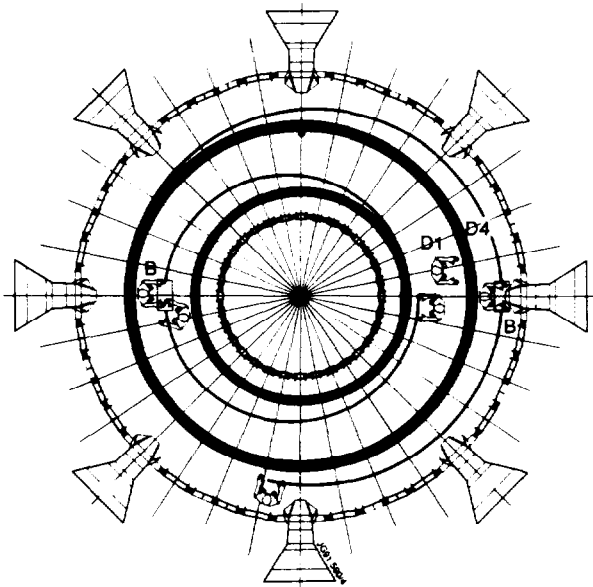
Plan view of assembly of coils 1 and 4 (D1, D4) showing brazing positions (B).
